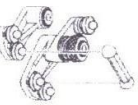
Change your settings by changing your ball end locations on the servo covers. The drag link is shown being removed.
